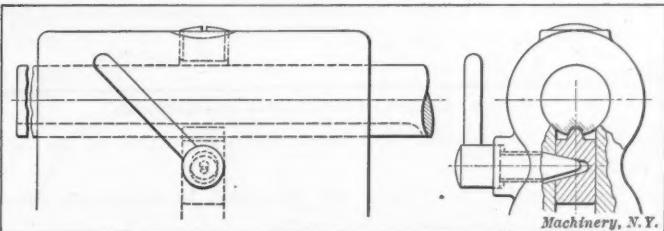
Wedge Action Clamp for Grinder Tailstock
